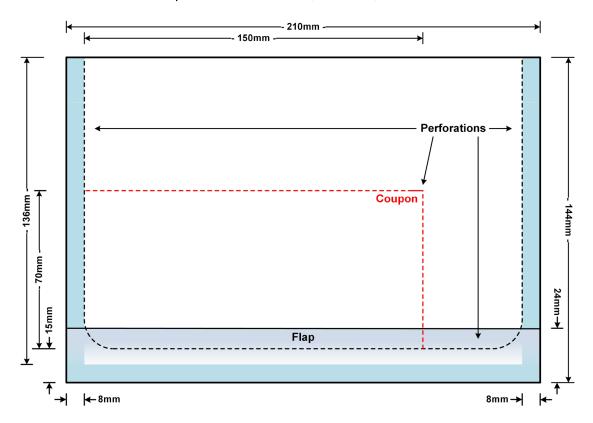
Fold & Seal Mailer with Coupon - Open Dimensions (Not to Scale)
